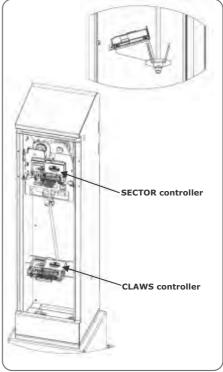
CONTROL CARD CARRIER ASSEMBLY
